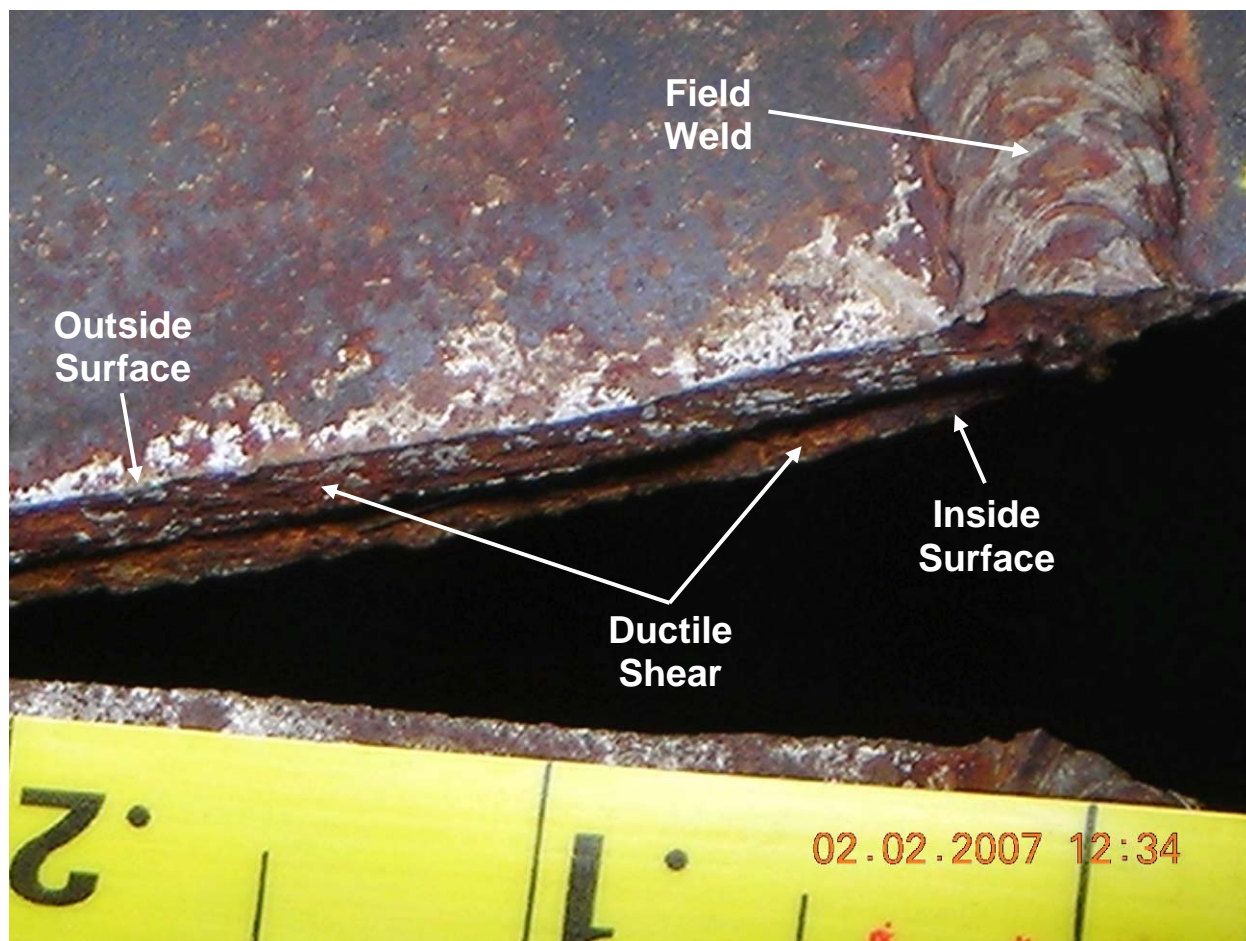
Close-up view of the transverse fracture surface adjacent to the longitudinal fracture in the east portion of the sales gas line.
